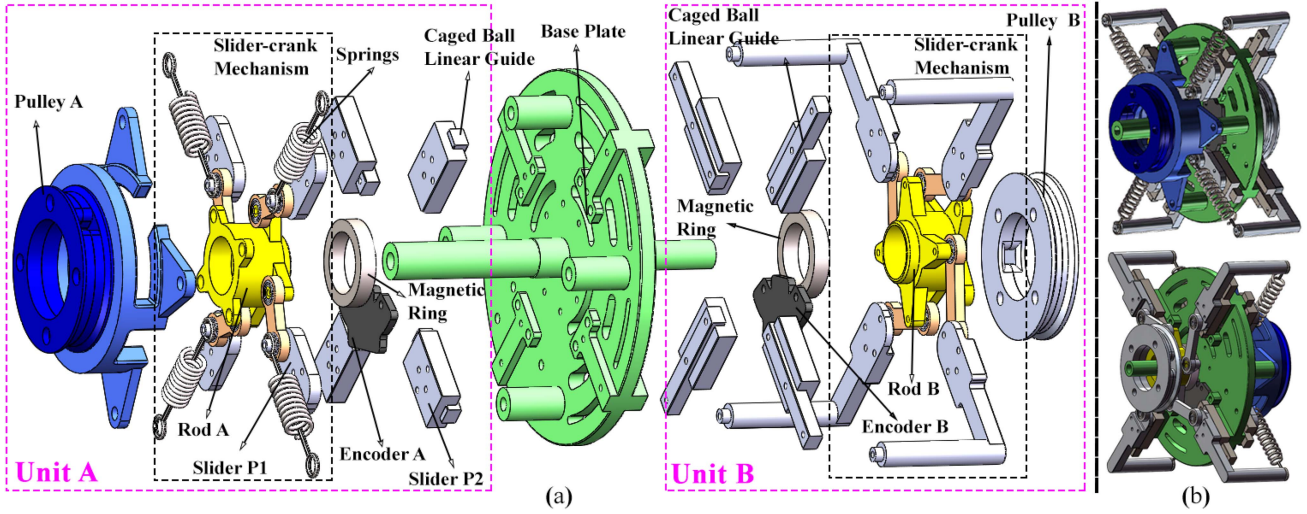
(a) Explode view of the LVSA. The unit A is the main compliant actuator unit. The unit B is the stiffness regulation unit. Rod A is the output rod of the unit A. Rod B is the input rod of the unit B. Each slider is consist of one slider P1 and one slider P2. The P1 is attached to the P2 by screws, and they are considered as a rigid segment as a whole. (b) Assembly views of the LVSA.
